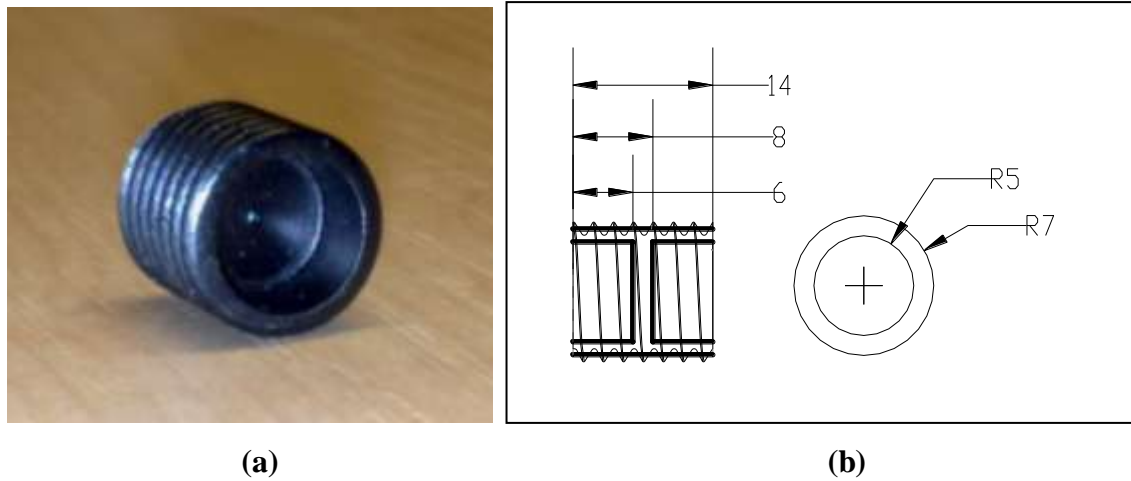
(a) Picture of surface cavity insert. (b) Surface cavity dimensions (mm).
